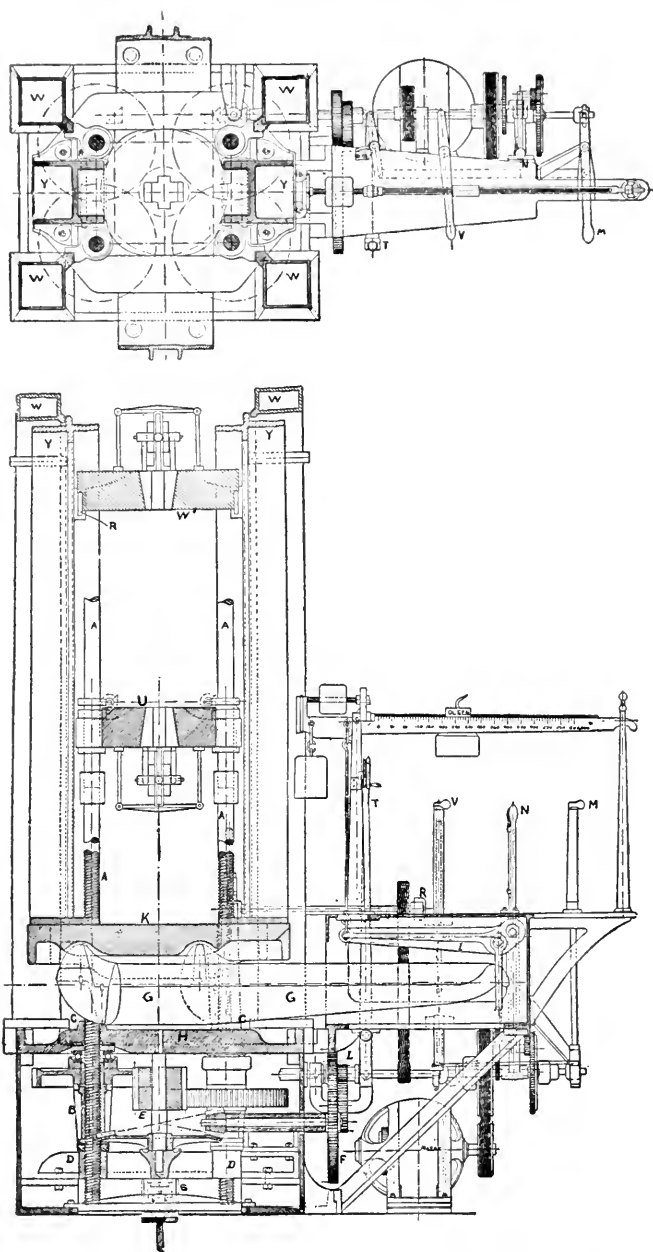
Details of Olsen's 600,000-lb. Universal Testing Machine.
